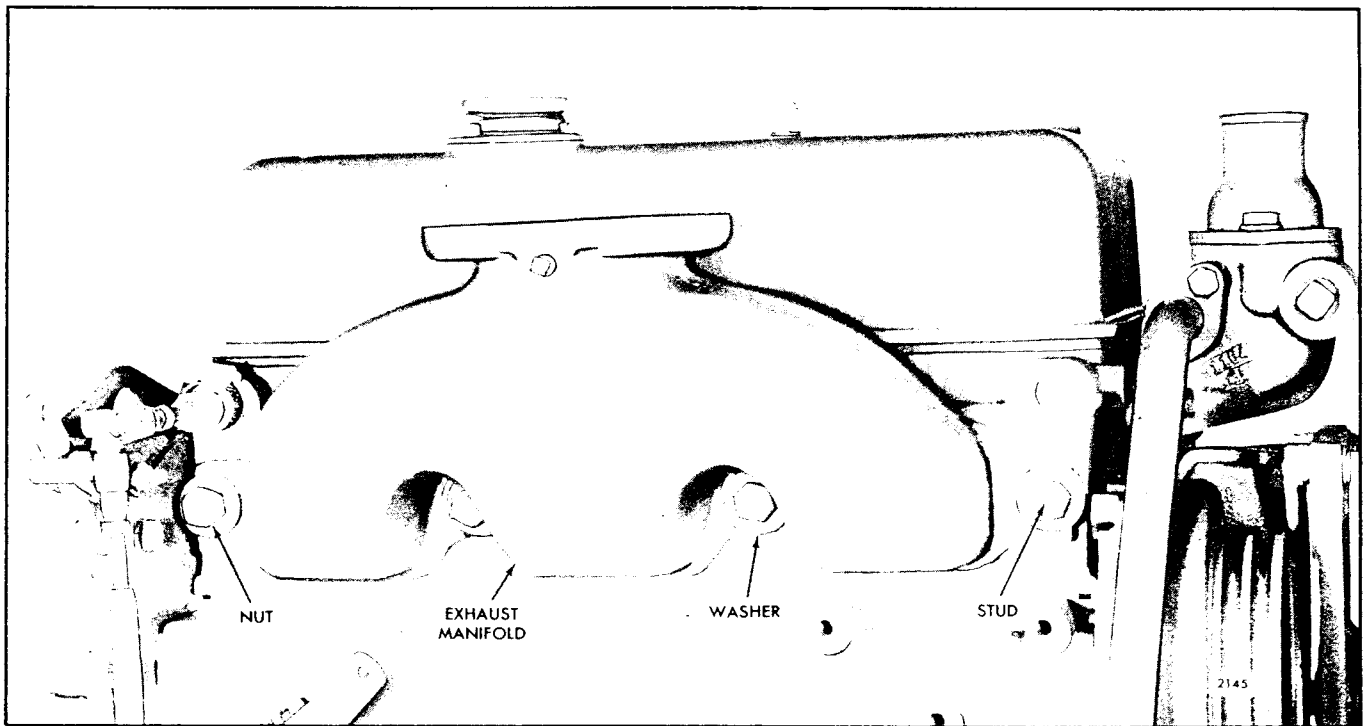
Typical Air-Cooled Exhaust Manifold (Square Flange) Mounting
